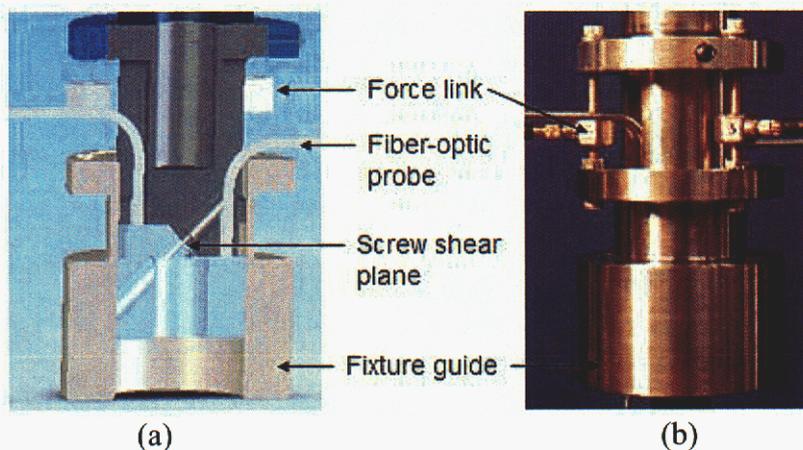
Angled shear fixture. (a) Solid model and (b) assembled with force links to measure frictional force from guide.
